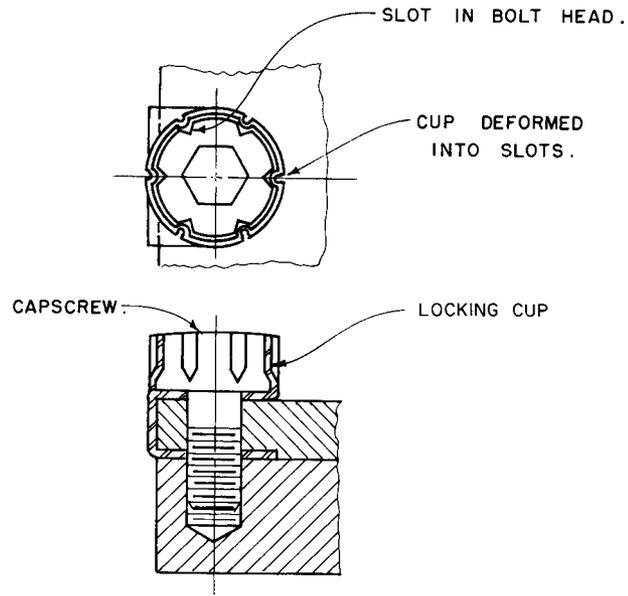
Class-A Locking Cup for Protruding Head Cap Screw.
